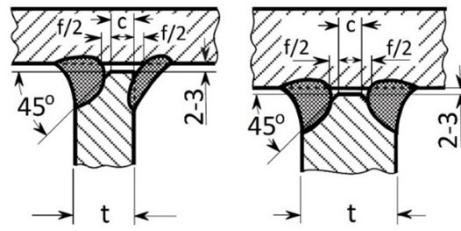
Single and double-bevel welds with unwelded root face and defined incomplete root penetration
